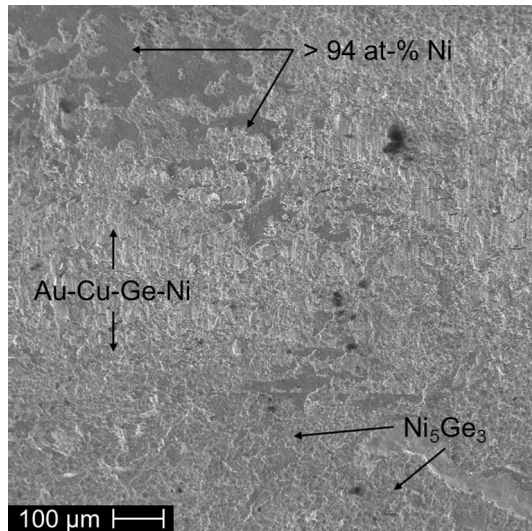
Fracture surface of a Cu/Au-28Ge/Ni joint, Ni side
